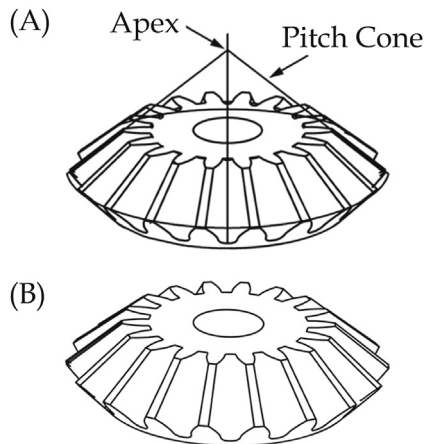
(A) Direction of teeth cut in straight bevel gear; (B) straight bevel gear.
